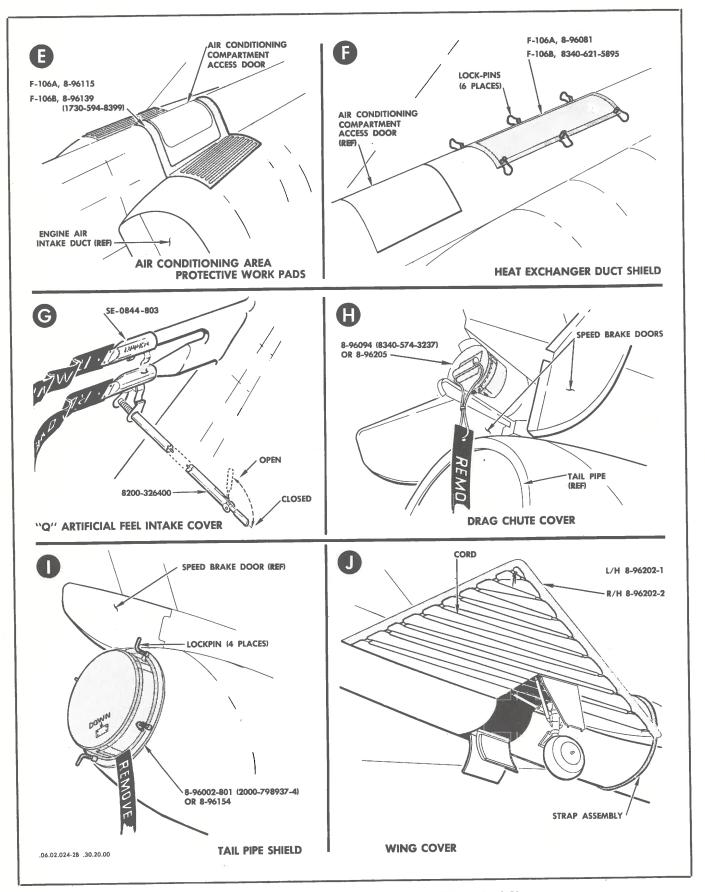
Protective Cover Installation (Sheet 2 of 3)
